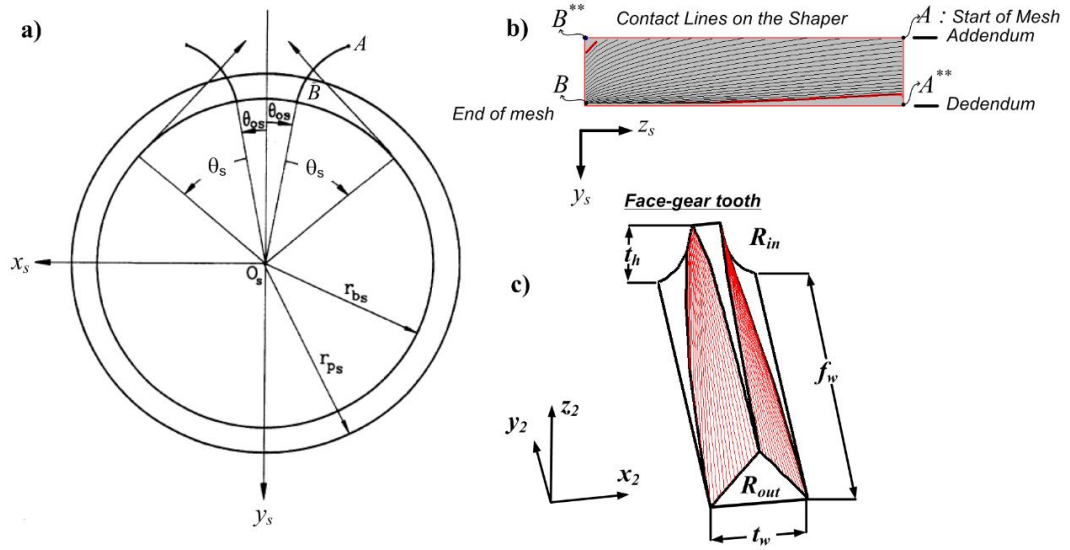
a) Spur shaper parameters [15]; b) Shaper from side view with contact lines; c) face-gear tooth
